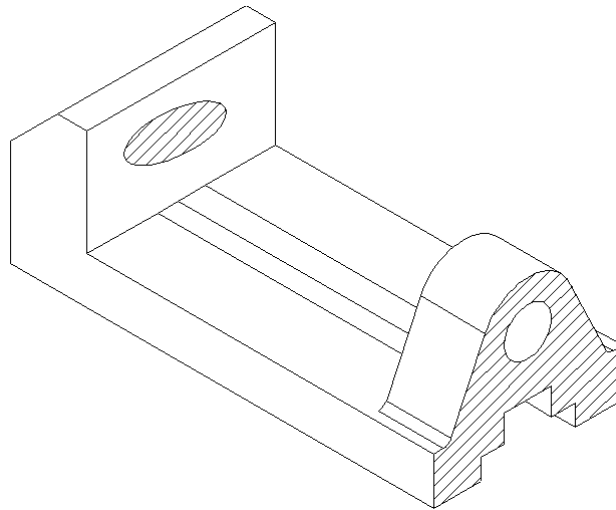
Hatch pattern applied to the 2D sketch and the planar face
